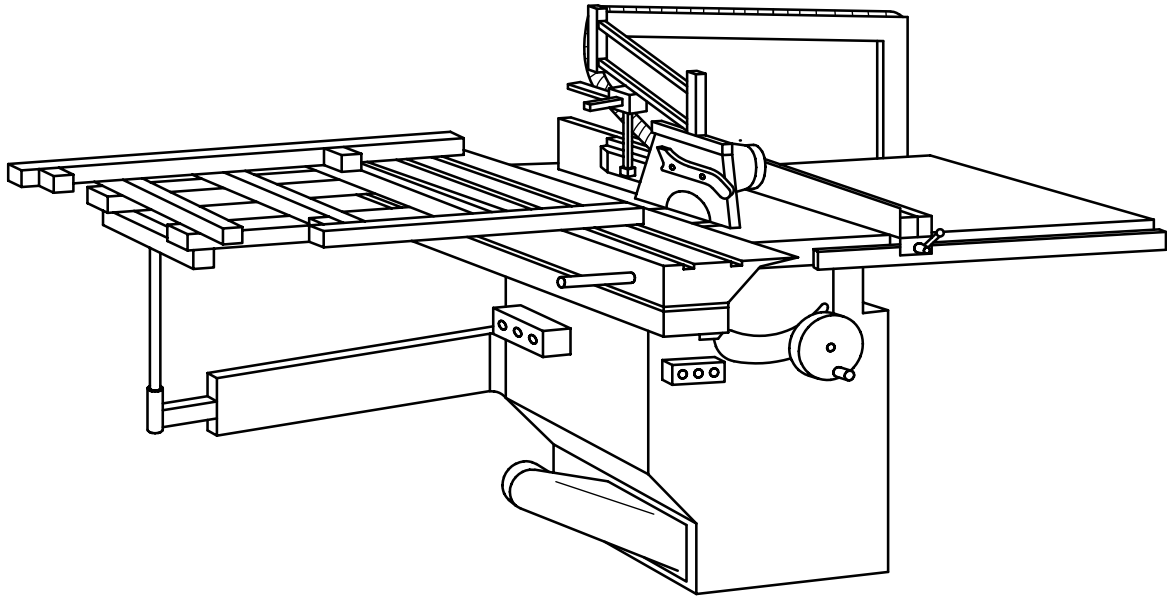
Example of a machine with dimension saw unit and moulding unit
